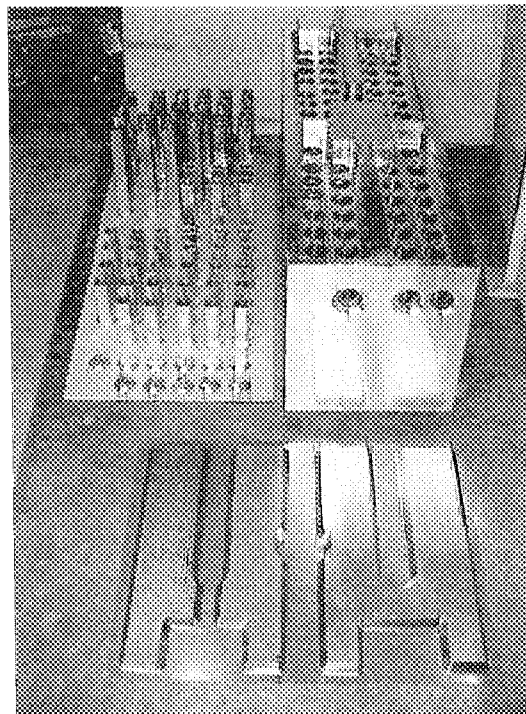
All prepared parts, shield block, coaxial tubes, coaxial flanges and front header plates
